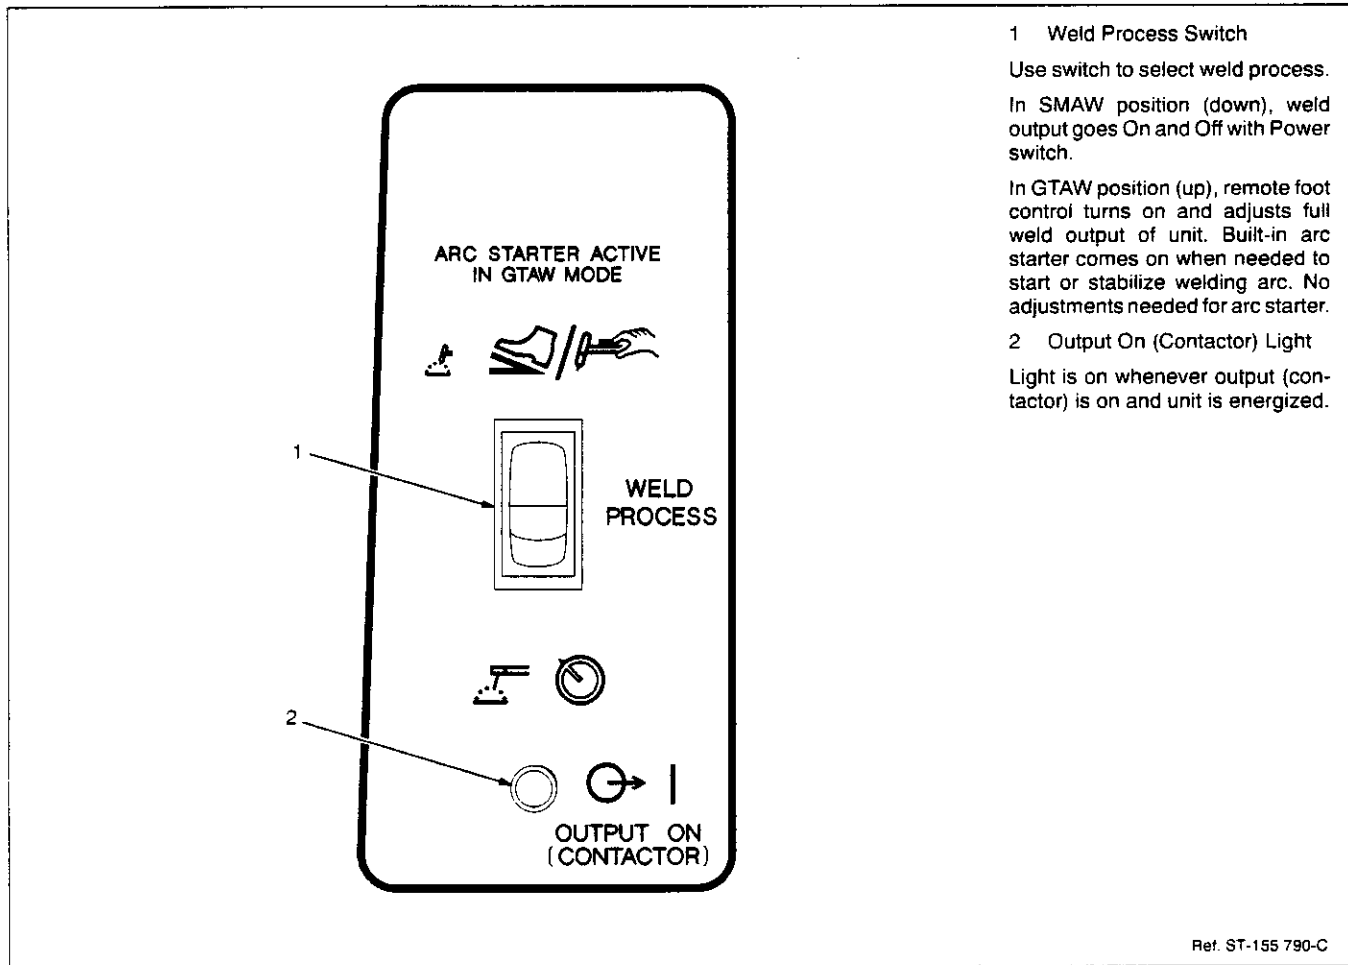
Weld Process Switch And Contactor Light
